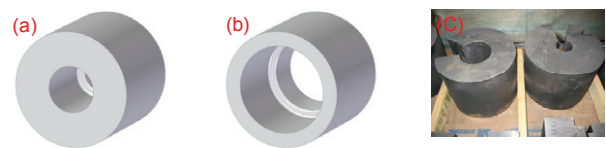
Workpieces, (a) 60 mm thick CGI and FGI; (b) 25 mm thick SGI; (c) Workpieces showing samples taken from the cylinders
